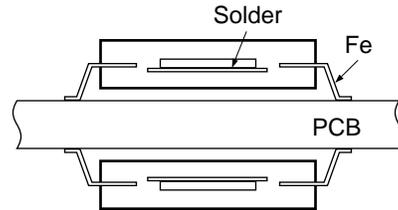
Multiple packages double-side mounted on PCB, without heat sink
